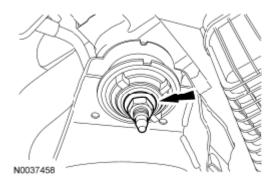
Locating Front Subframe Nut Courtesy of FORD MOTOR CO.
